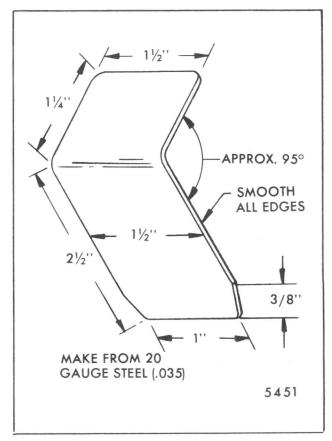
Head Restraint Anti-Removal Lock Releasing Tool
